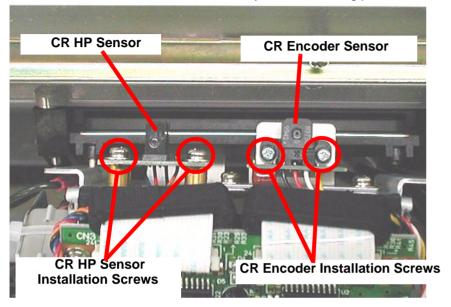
Fig. 4-51 Removing the CR HP Sensor and Encoder Sensor
